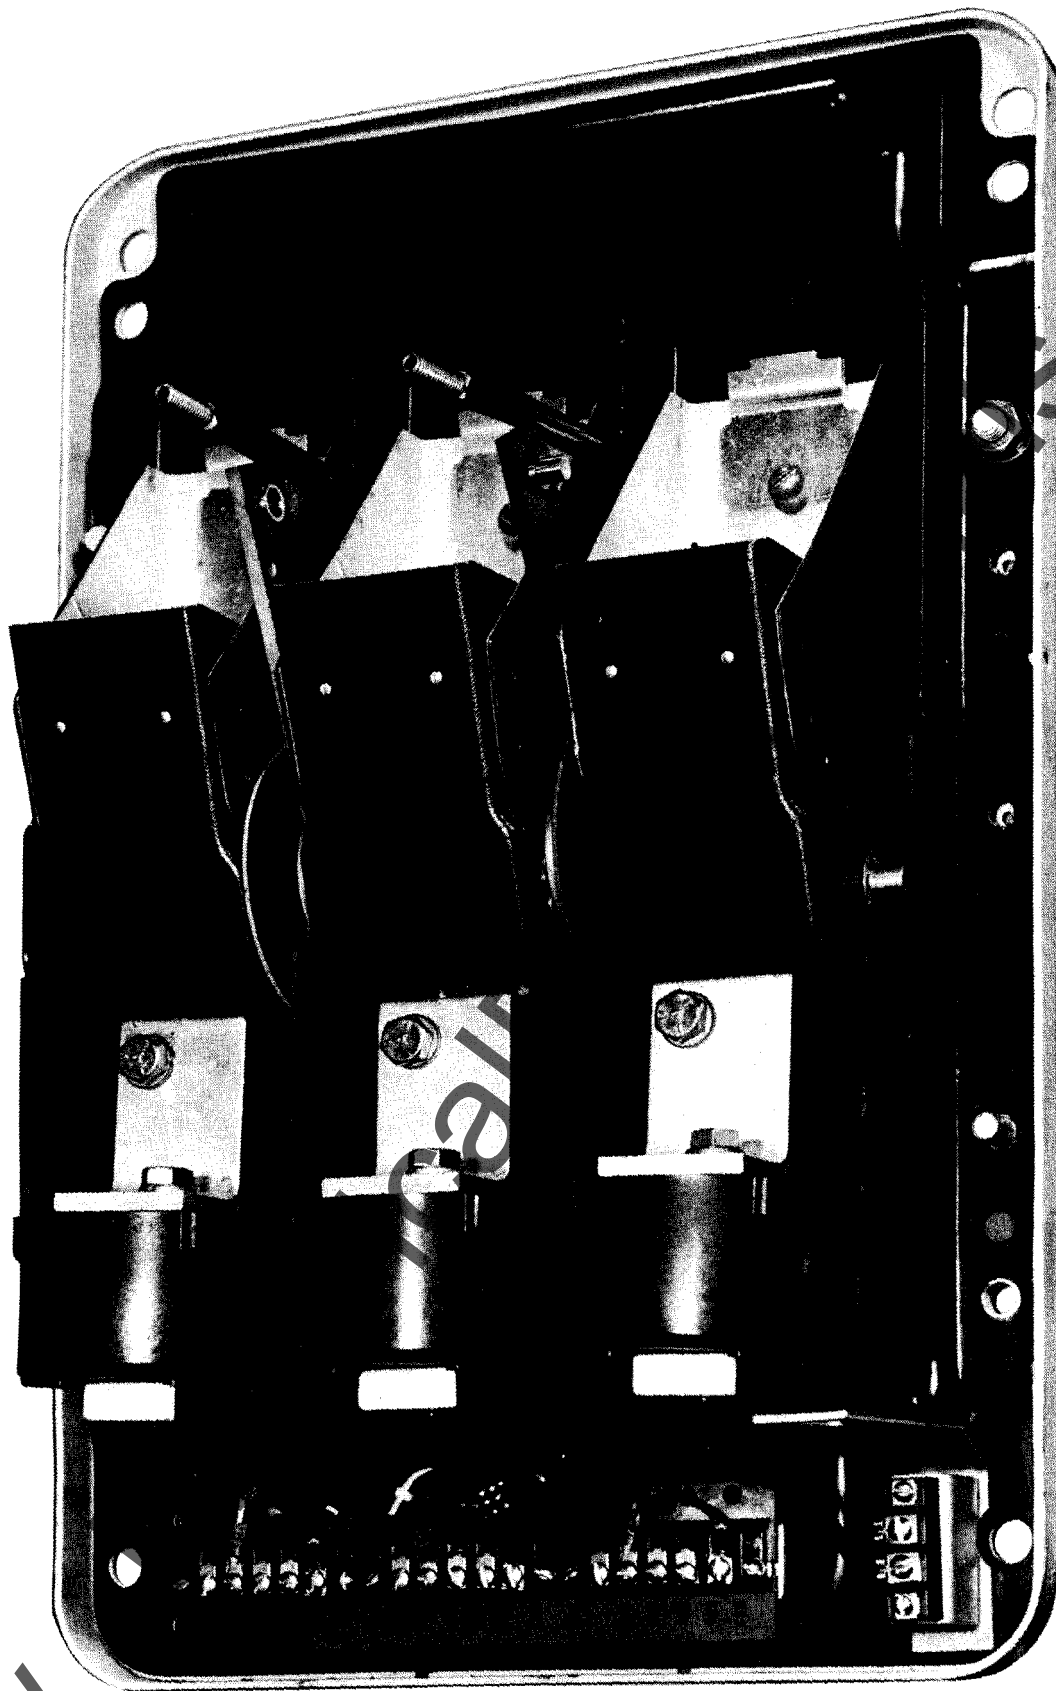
AK-25 back frame with SST conversion components installed and ready for reassembly to front frame.
